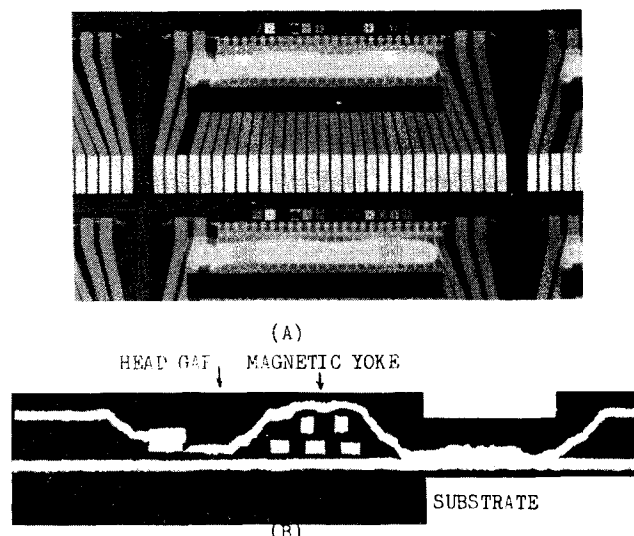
Photograph of the fabricated head (A) and the cross-section of the head (B).
